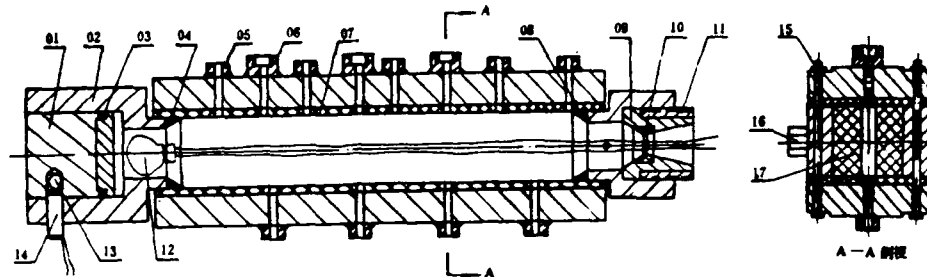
Experimental motor. Key: (01) piston; (02) housing; (03) seal; (04) forward transitional section; (05) water hole; (06) pressure measuring hole; (07) fireproofing layer; (08) rear transitional section; (09) nozzle; (10) graphite lining; (11) fitted screw cap; (12) ignition powder pack; (13) interruption powder pack; (14) dowel; (15) bolt assembly; (16) pressure measuring hole; (17) charge.
